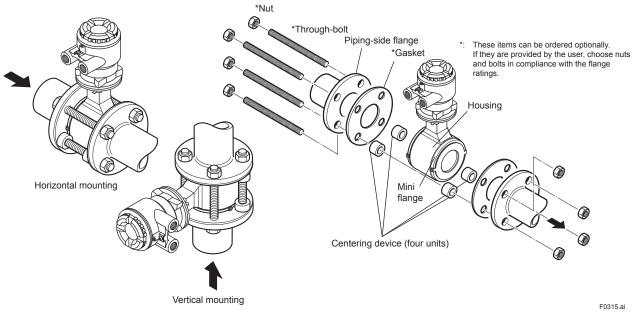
Mounting Procedure for Wafer Type (sizes: 50 to 200 mm (2 to 8 in.))
